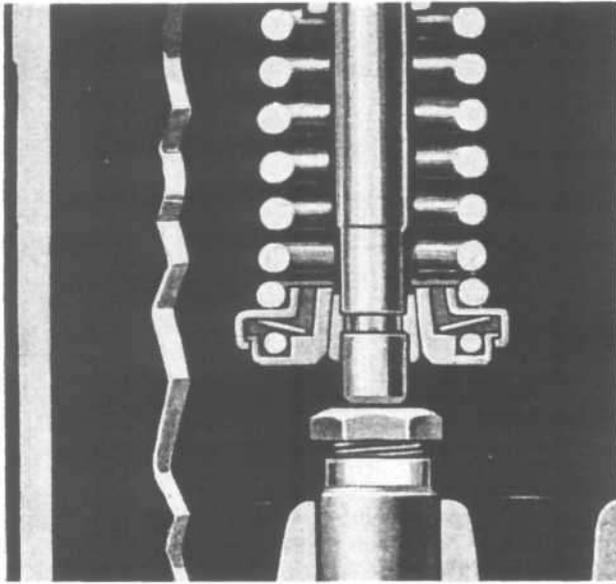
VALVE WITH BEARING TYPE ROTATOR
